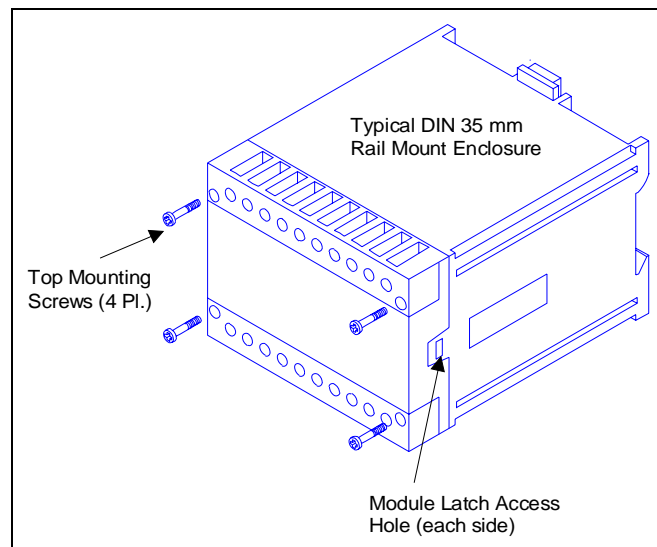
Accessing Rail Mount Enclosure Interior PCB
